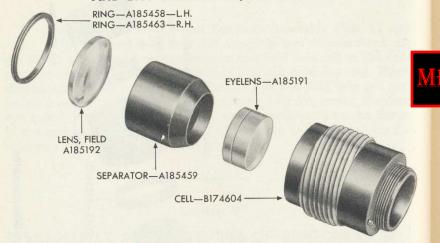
Binocular M13—Eyepiece Cell Assembly Disassembled
